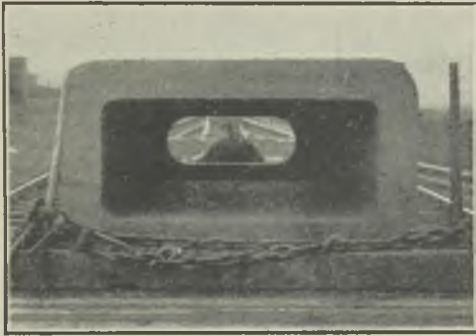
A 21-TON ORDINARY MOULD CASTING.
